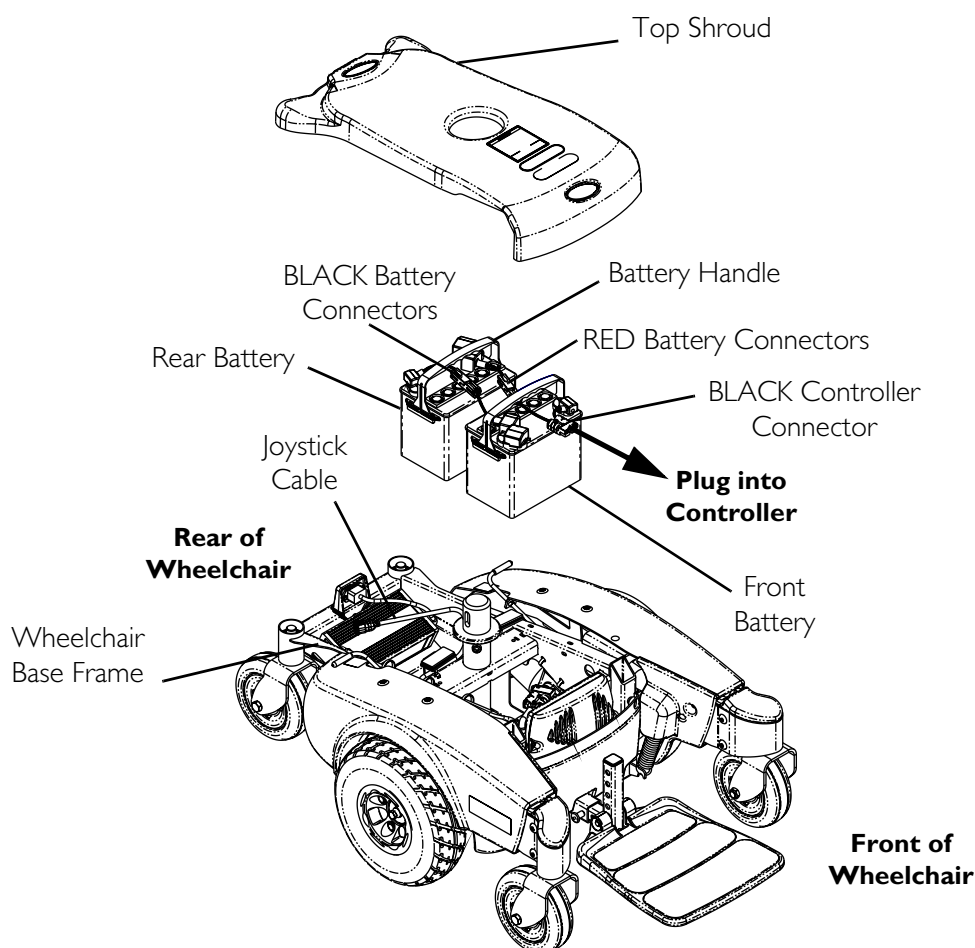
Removing/Installing Batteries from/into Battery Tray
